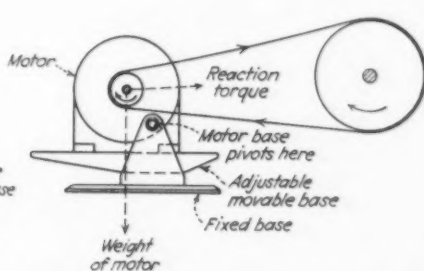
American Pulley type pivoted motor base drive. Motor pivots above the plane of the motor feet.
